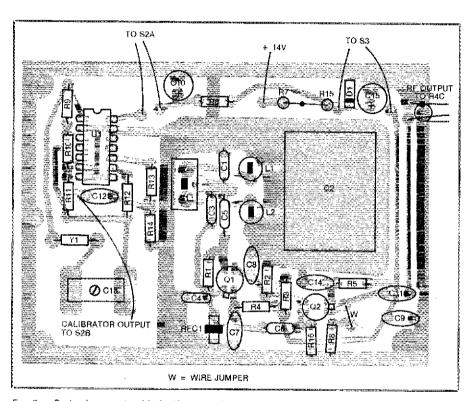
Parts-placement guide for the general-coverage receiving adapter. Parts are placed on the unclad side of the board; the shaded area represents an X-ray view of the copper pattern.
